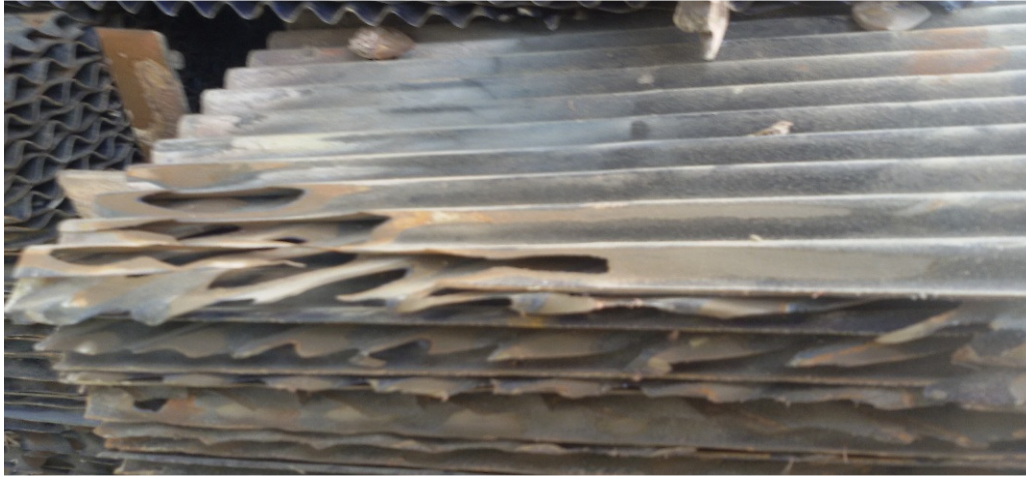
Metal filler corroded of the used pre-heater, formed by metal undulated sheet metal comb
